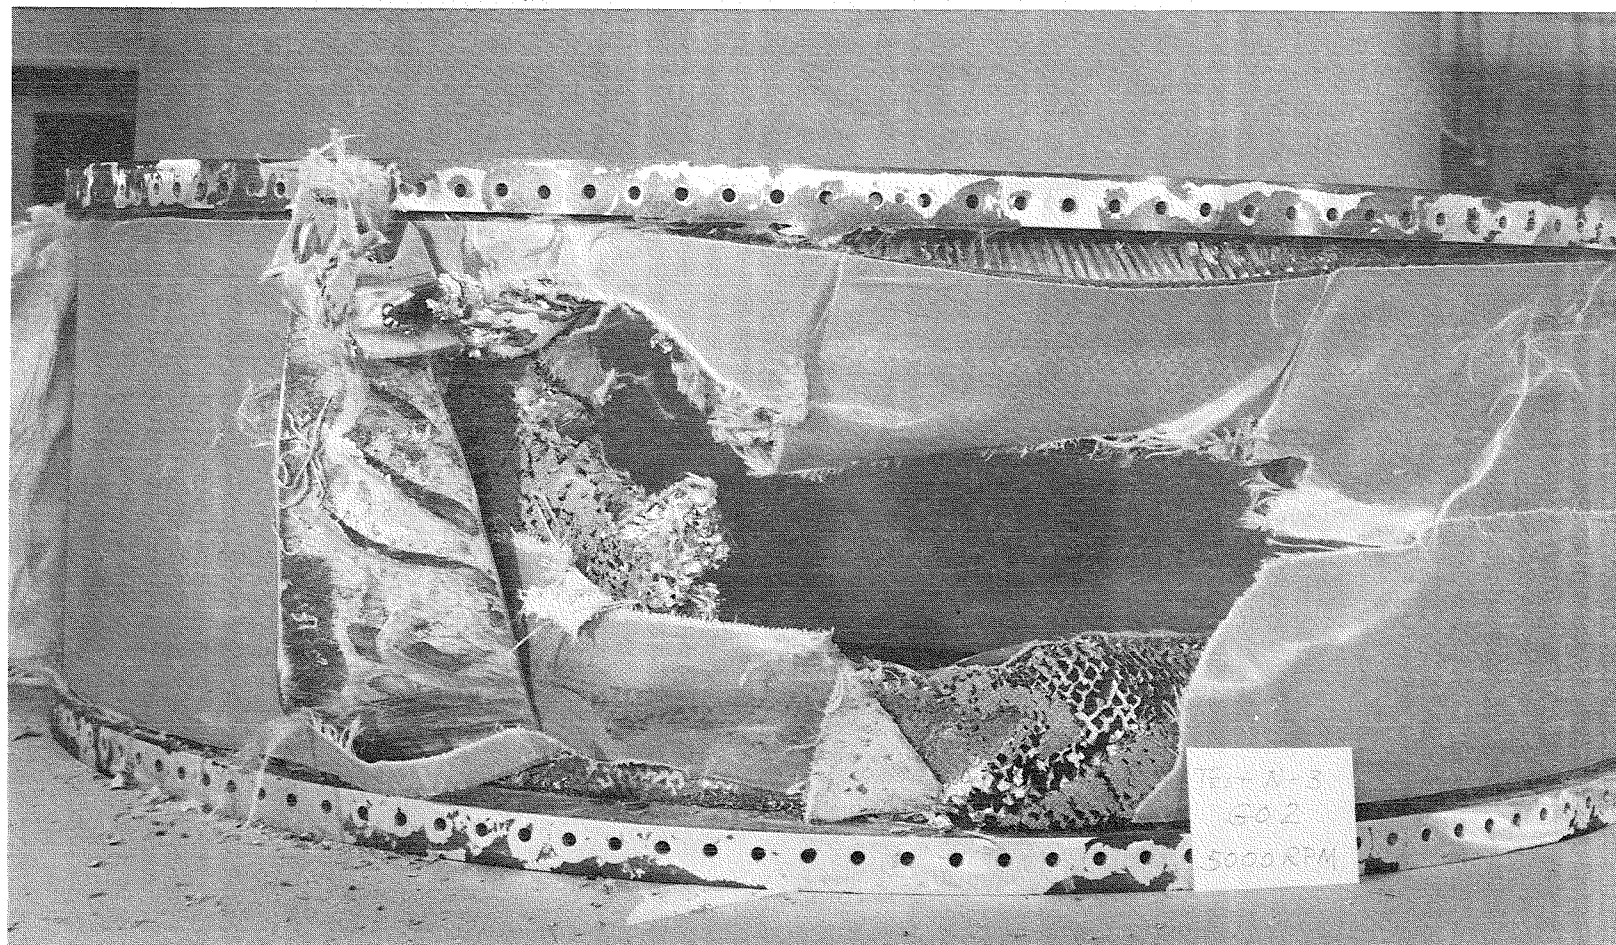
Exterior View - Eight-Ply Side - Kevlar Removed -
